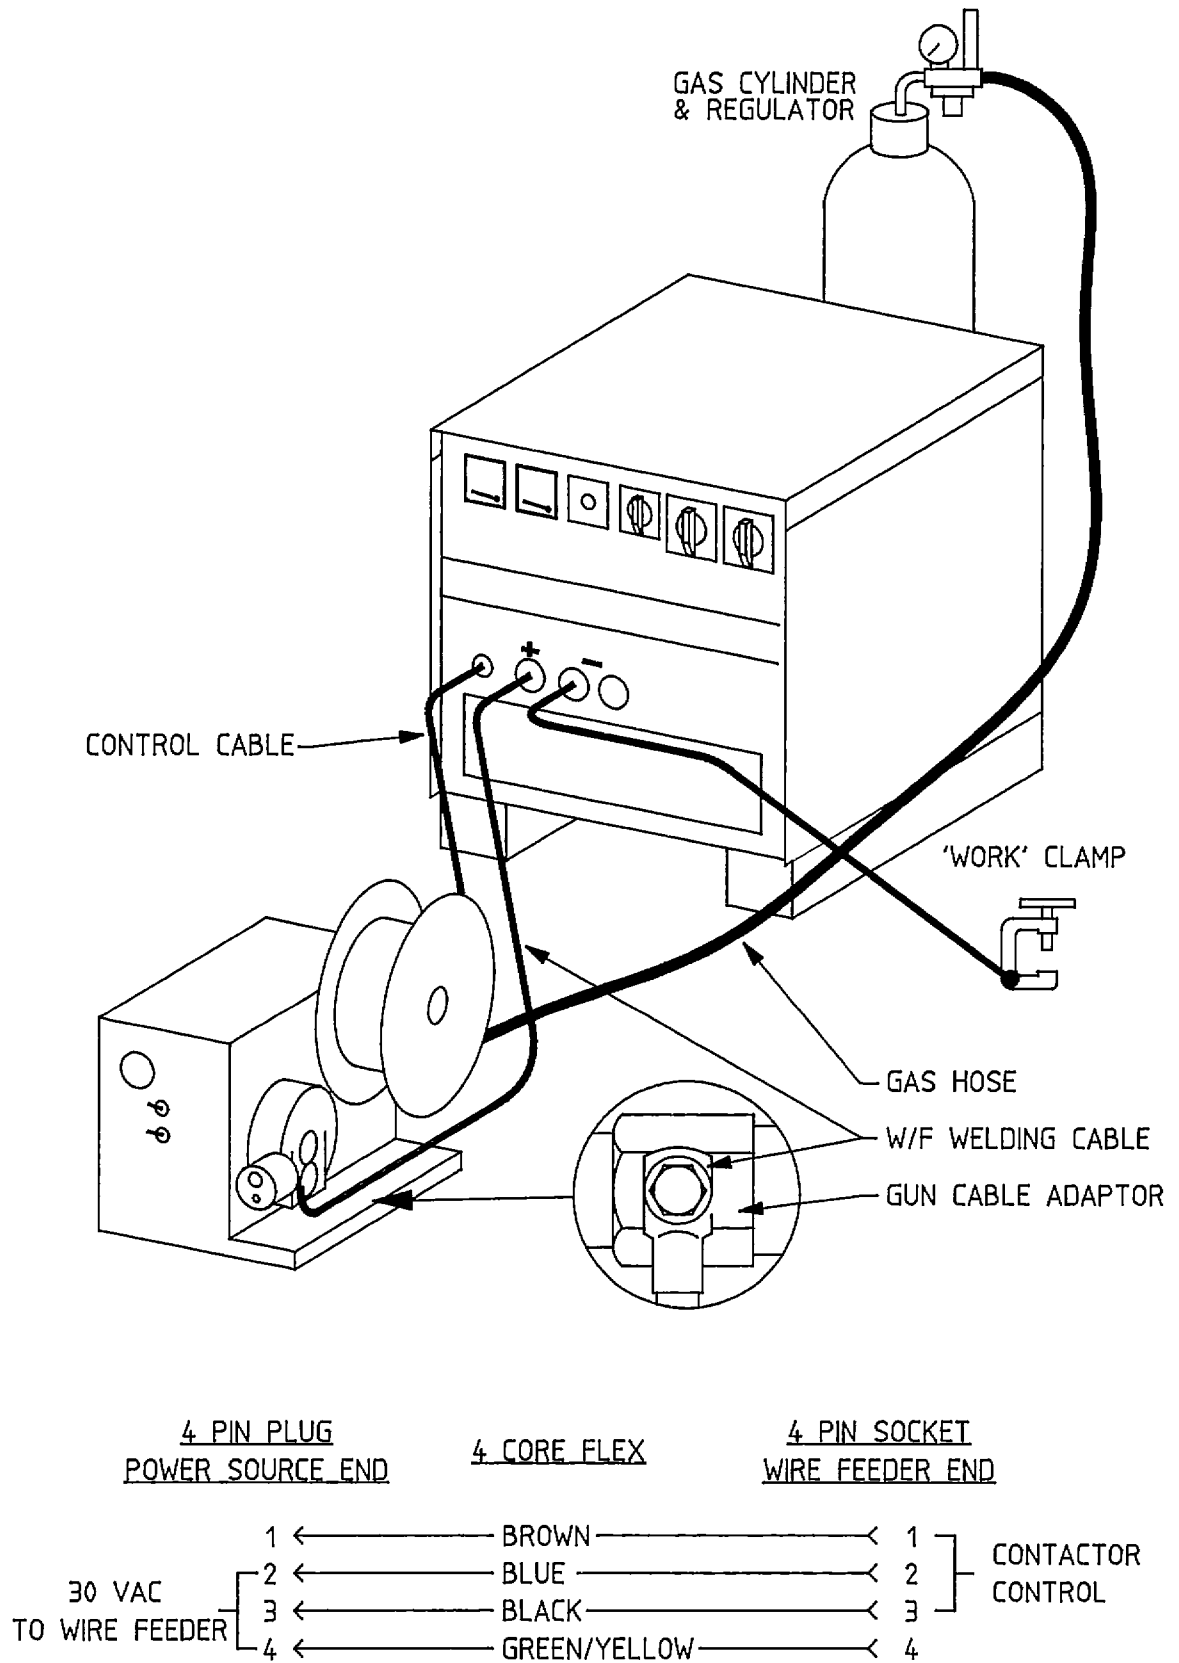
CABLE AND HOSE CONNECTIONS, ELECTRODE POSITIVE GMAW
